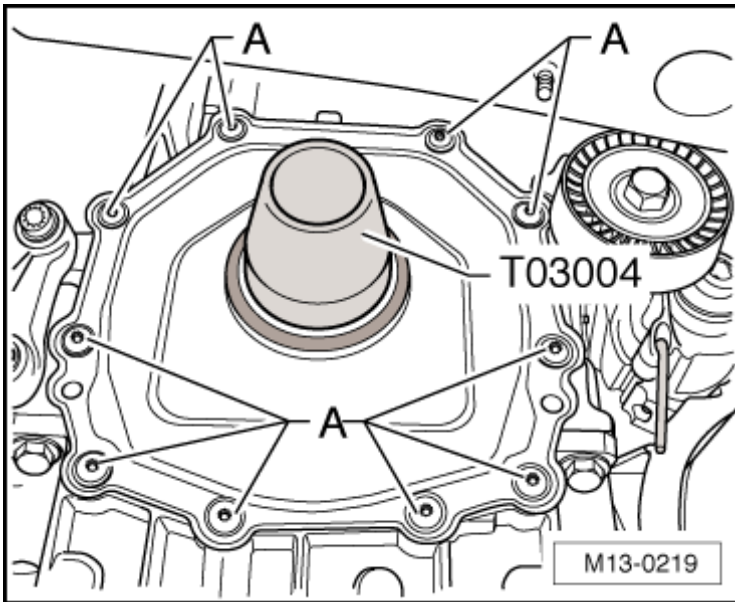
Inserting Sealing Flange Using Assembly Sleeve T03004 On Crankshaft Journals And Pressing Uniformly On Cylinder Block
